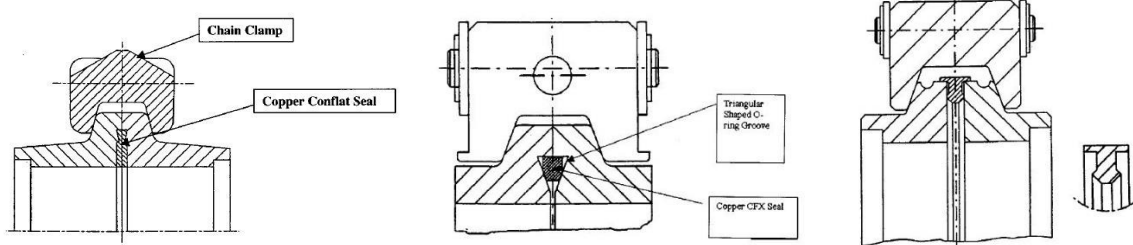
Schematic drawings of 3 quick disconnect flanges (Mapes, 2001): EVAC CF flange assembly (left), EVAC CFX flange assembly (center) and EVAC ISO flange assembly (right).
